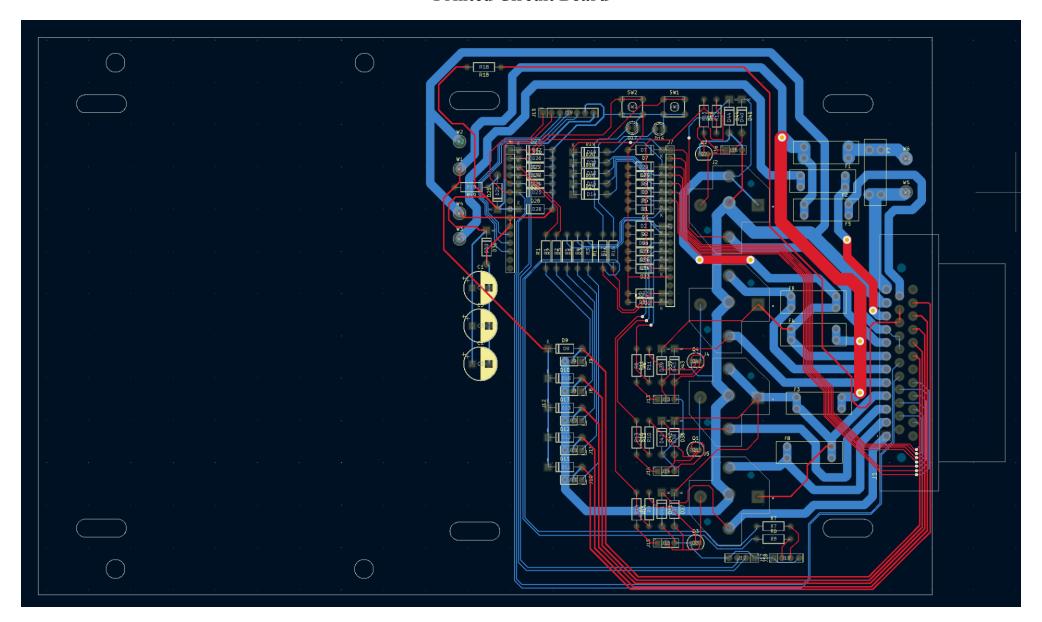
Circuit Side View of the PCB Showing the Traces and Wire Connections Between Components
